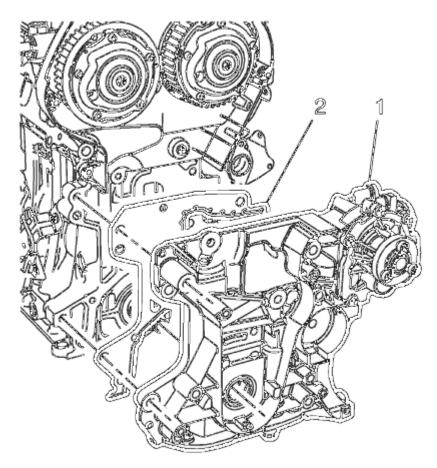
Engine Front Cover And Seal Courtesy of GENERAL MOTORS COMPANY
